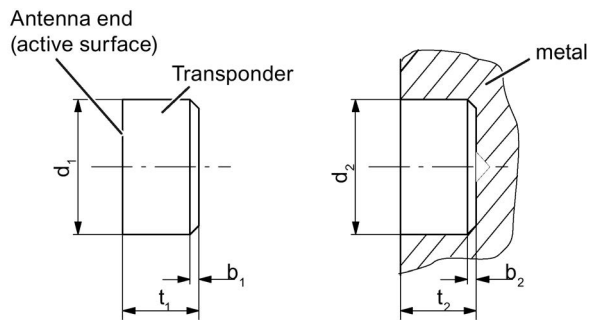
Flush-mounting of MDS D421 in metal with tools
